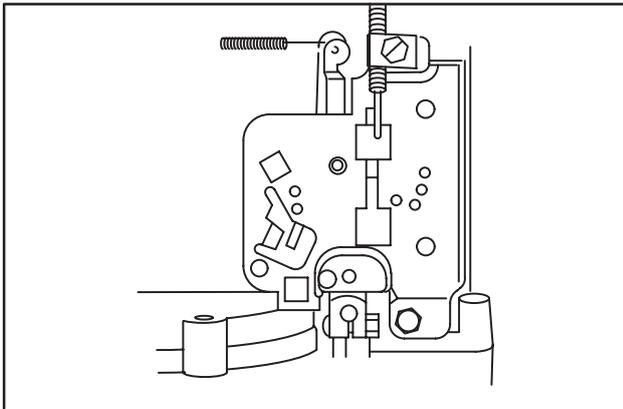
170700, 190700, 191700, 192700, 193700, 194700, 195700, 196700, 220700, 252700, 253700, 254700, 257700, 256700, 258700, 280700, 28A700, 28B700, 28C700, 28D700, 28M700, 283700, 286700, 289700 with Vertical Rack & Pinion Control for Briggs & Stratton/Walbro LMT Carburetors
